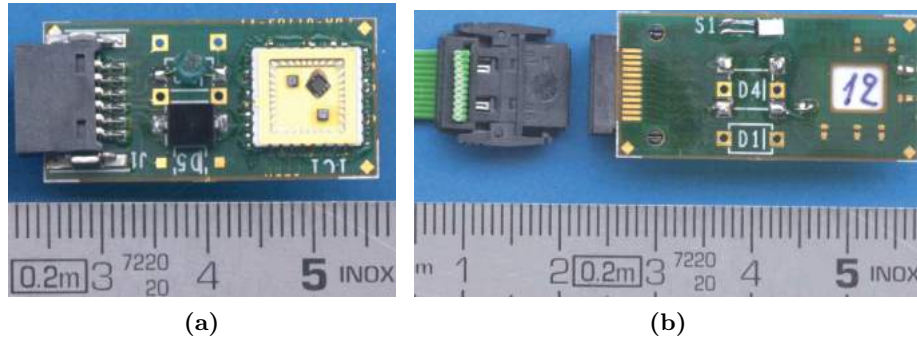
PCB front-side with 2 p-i-n diodes and 3 RadFET dies on board (a) and PCB back-side with additional place for more dosimeters and external cabling (b).
